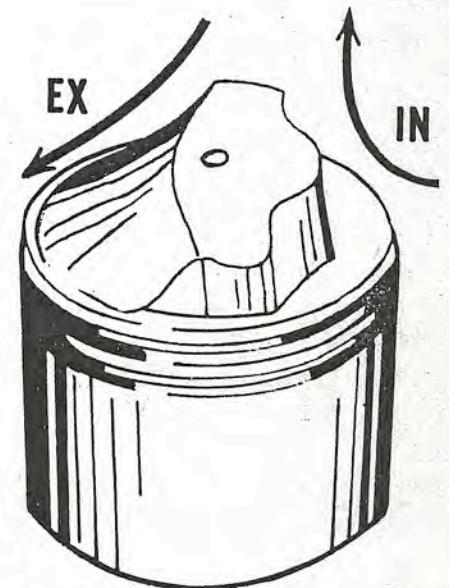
Baffle on top of piston head directs flow of incoming fuel mixture for proper scavenging of exhaust gases.
